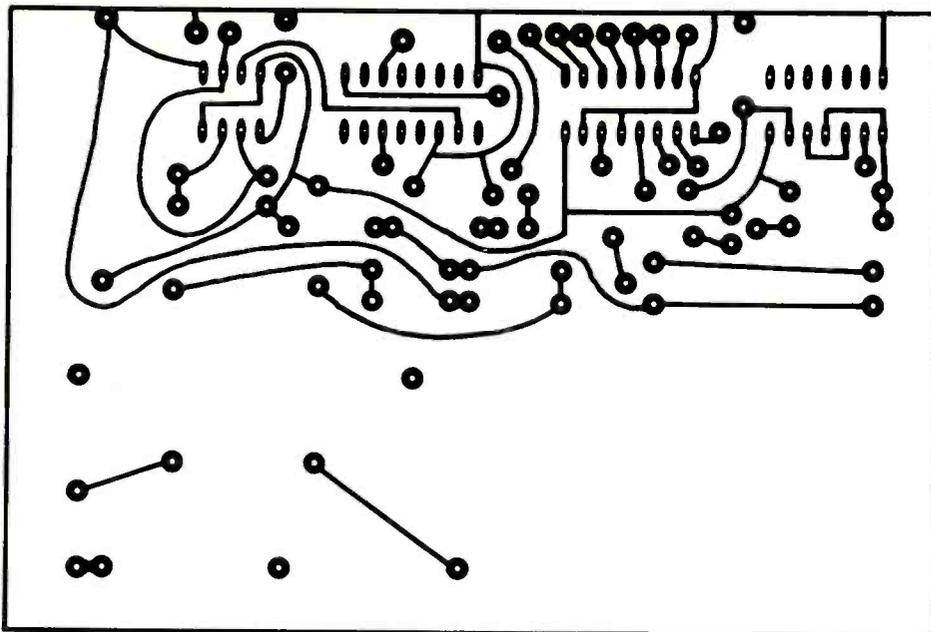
Actual-size etching-and-drilling guide for Fuel Miser pc board.
